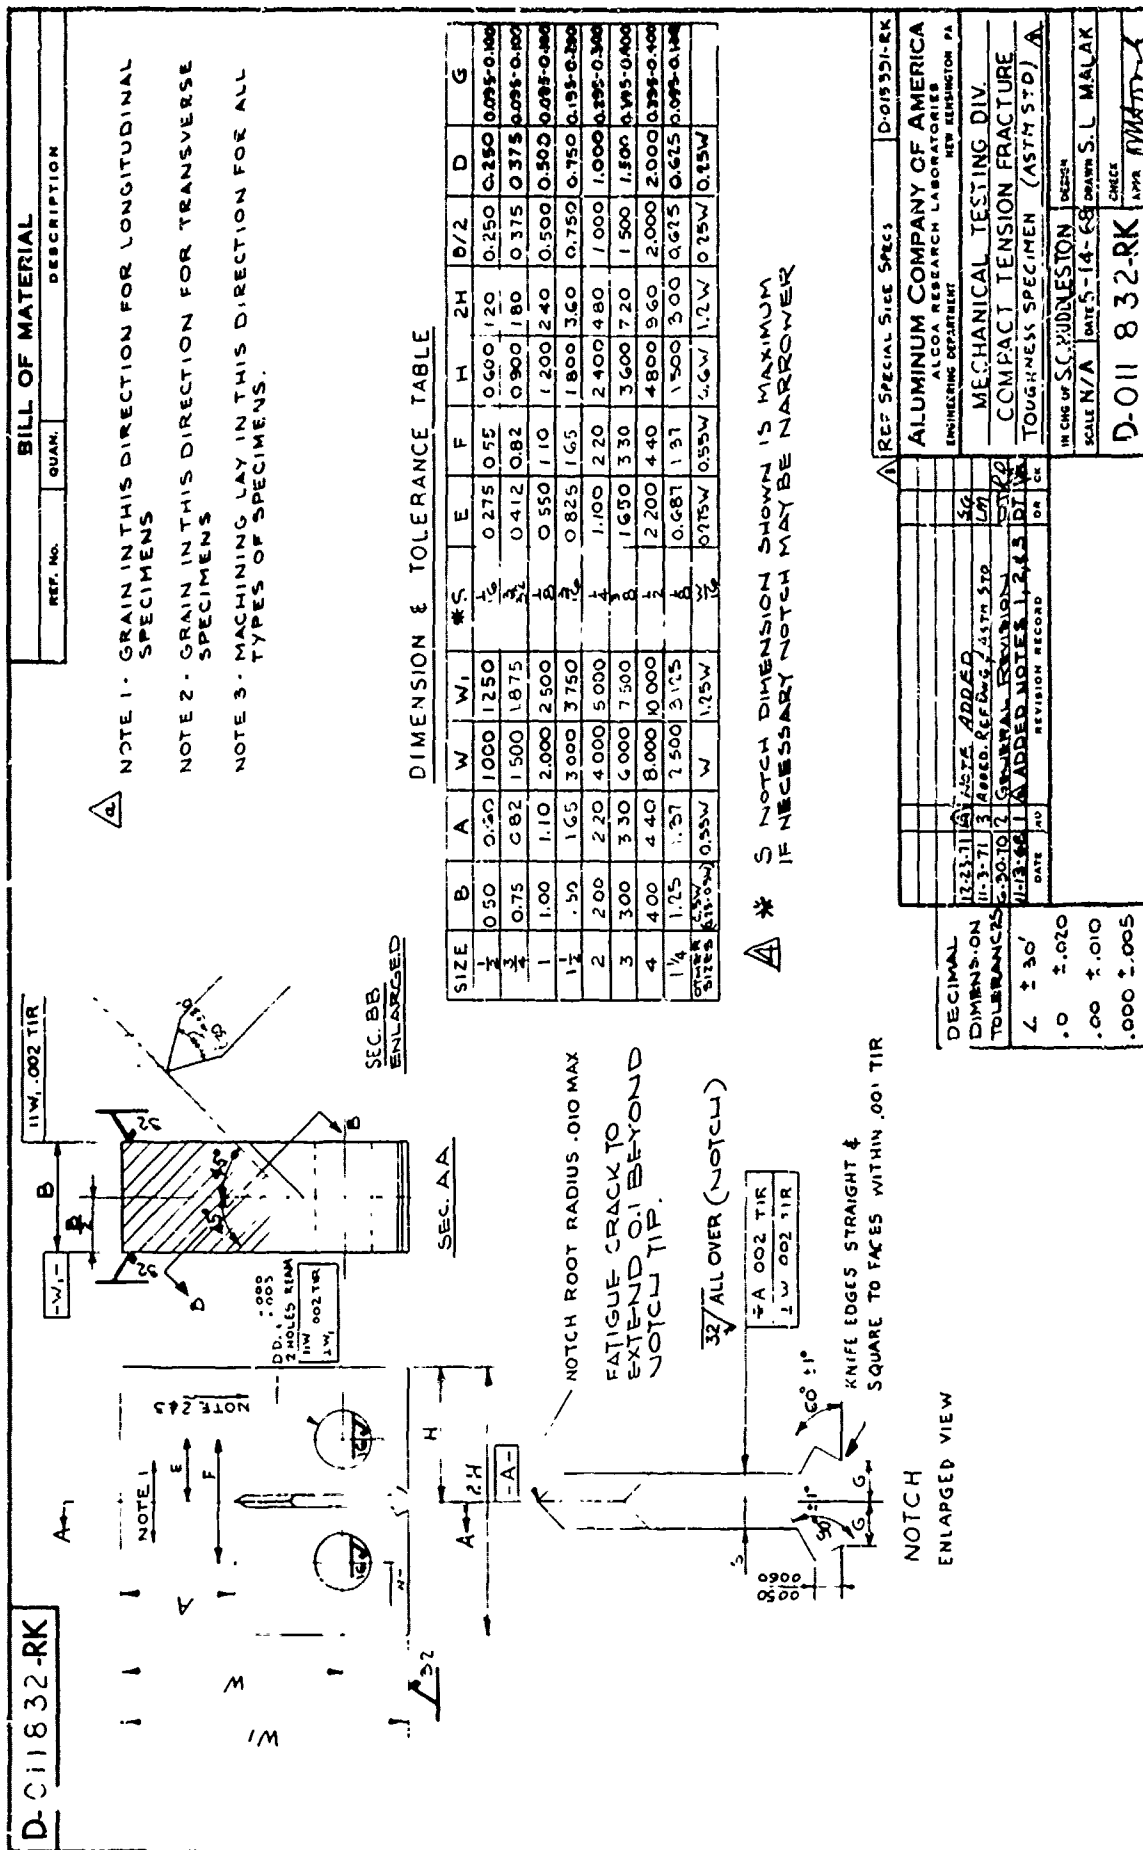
FRACTURE TOUGHNESS SPECIMEN
